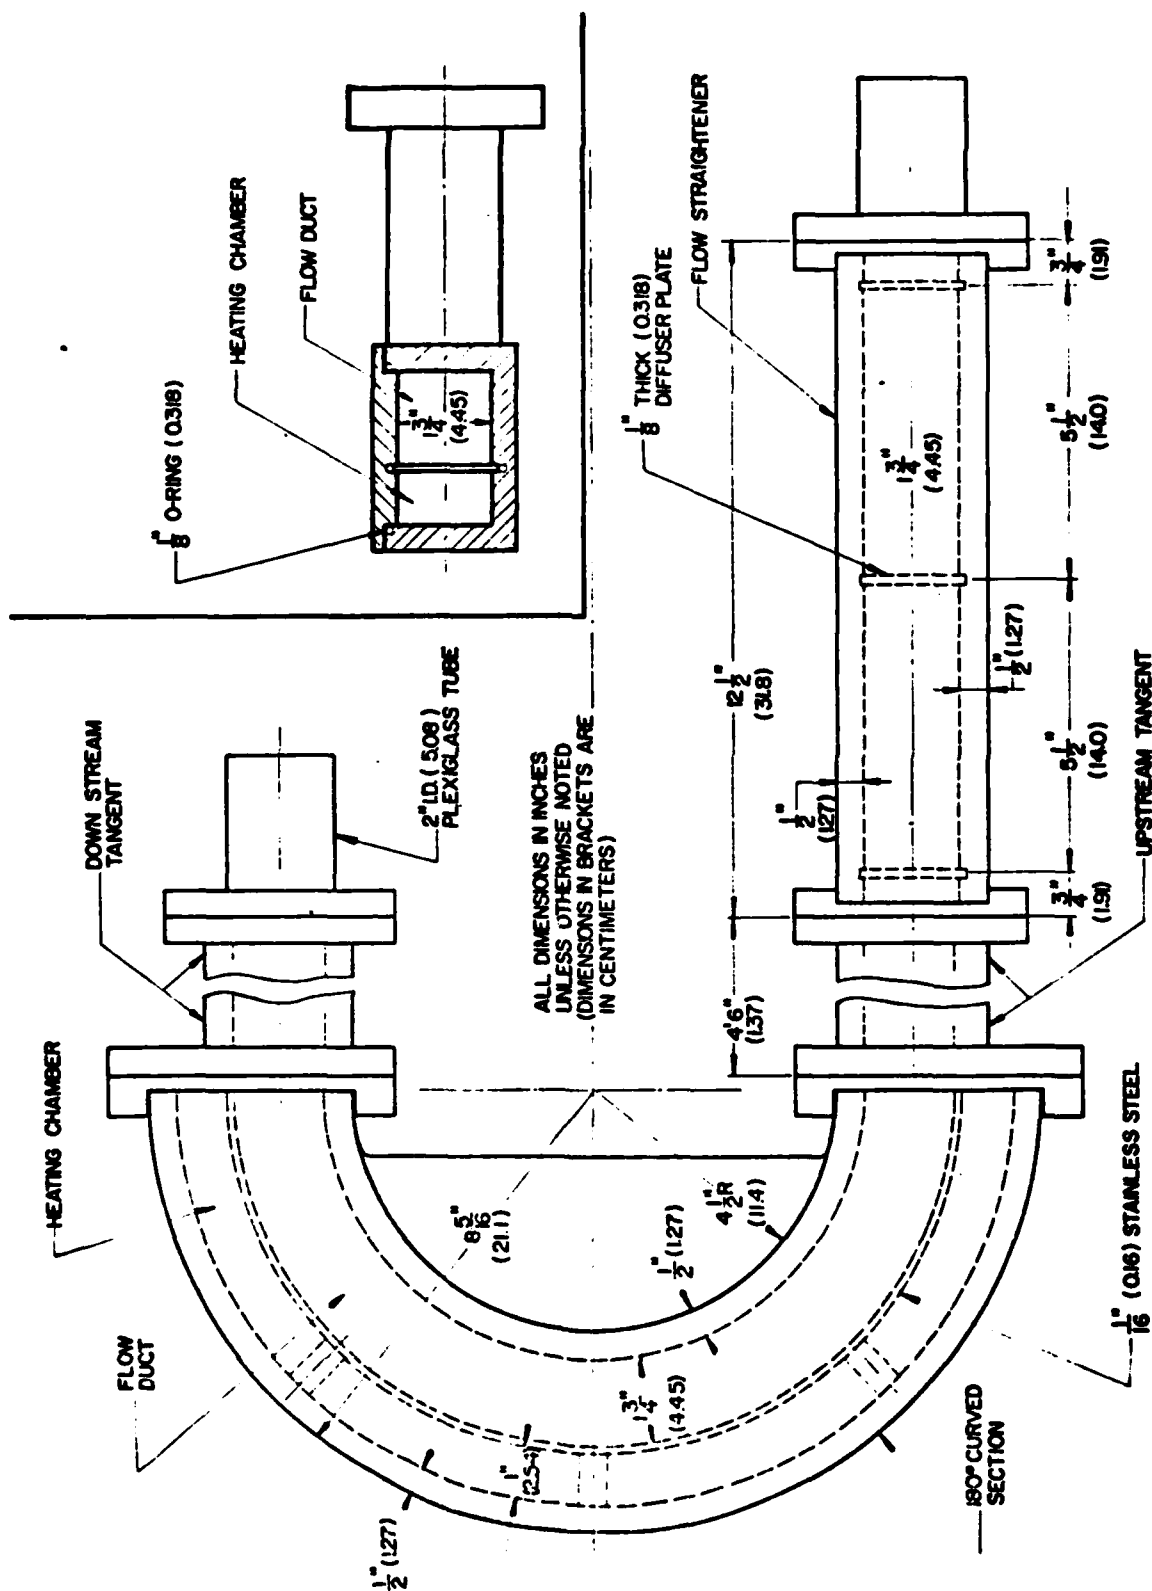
Detailed view of flow test section. Insert shows cross-section at 90 degrees.
